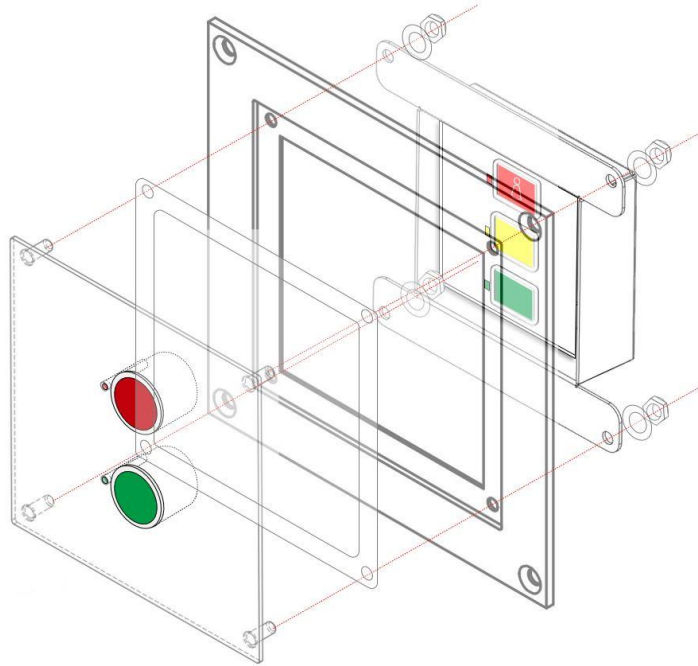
Assembling the device panel, device panel gasket, front panel and device frame with button modules
